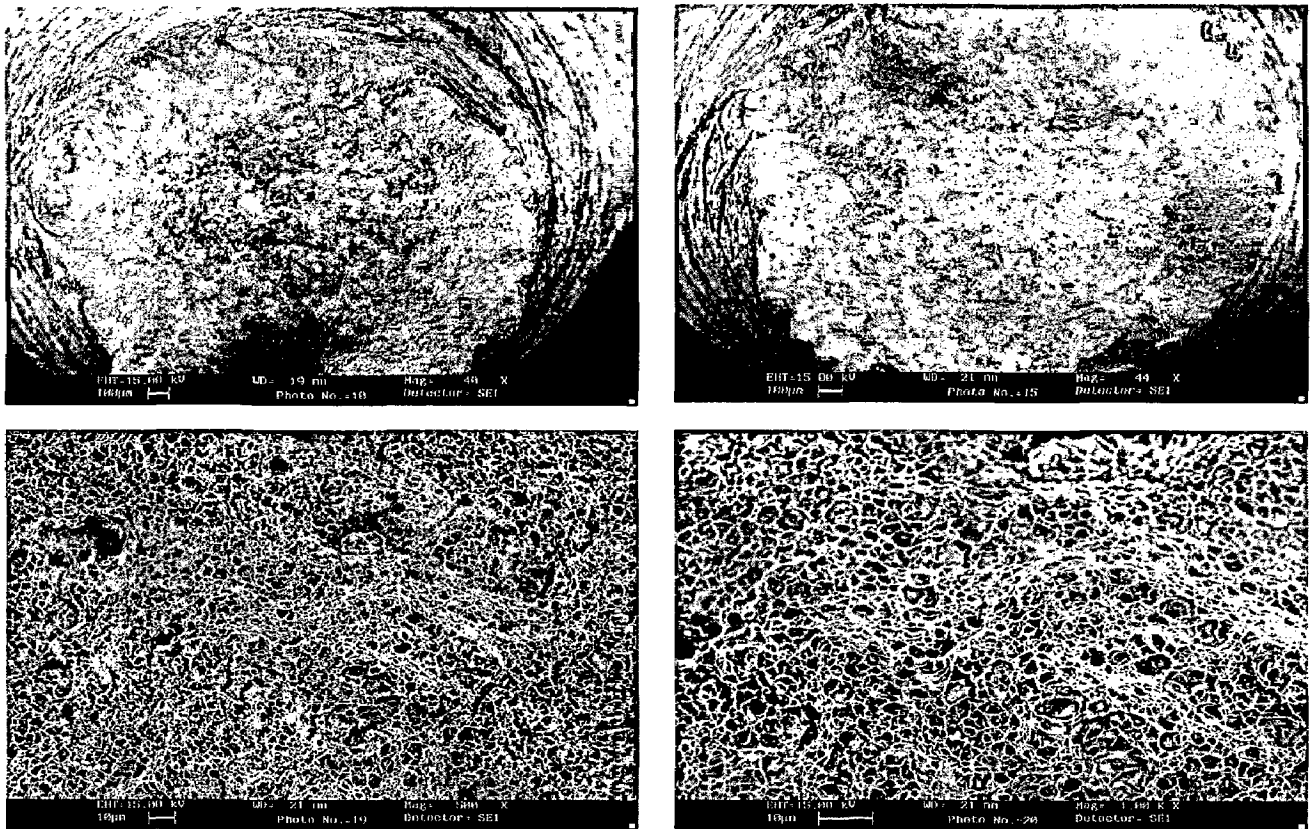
Tensile Fractographs of friction welded AISI 304 and AISI 4140 by keeping burn off length 5 mm.
